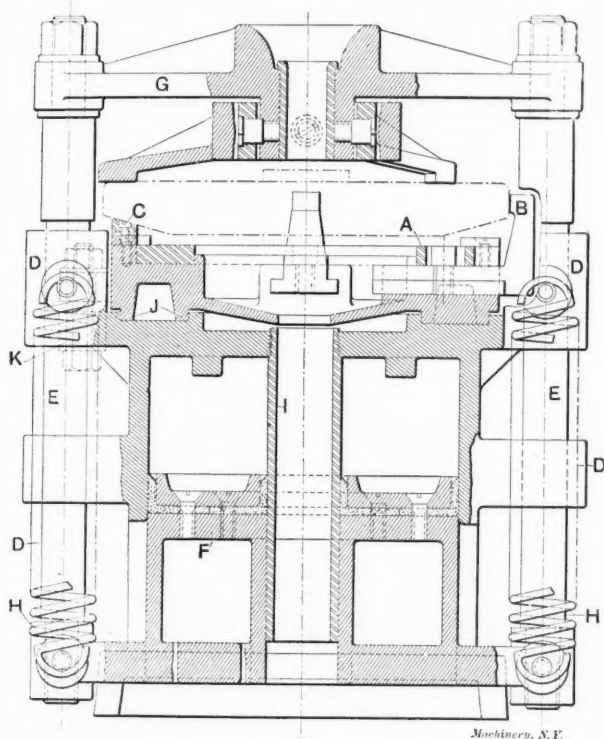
Vertical Section, Pneumatic Clamping Jig for Work on Agricultural Machinery.
